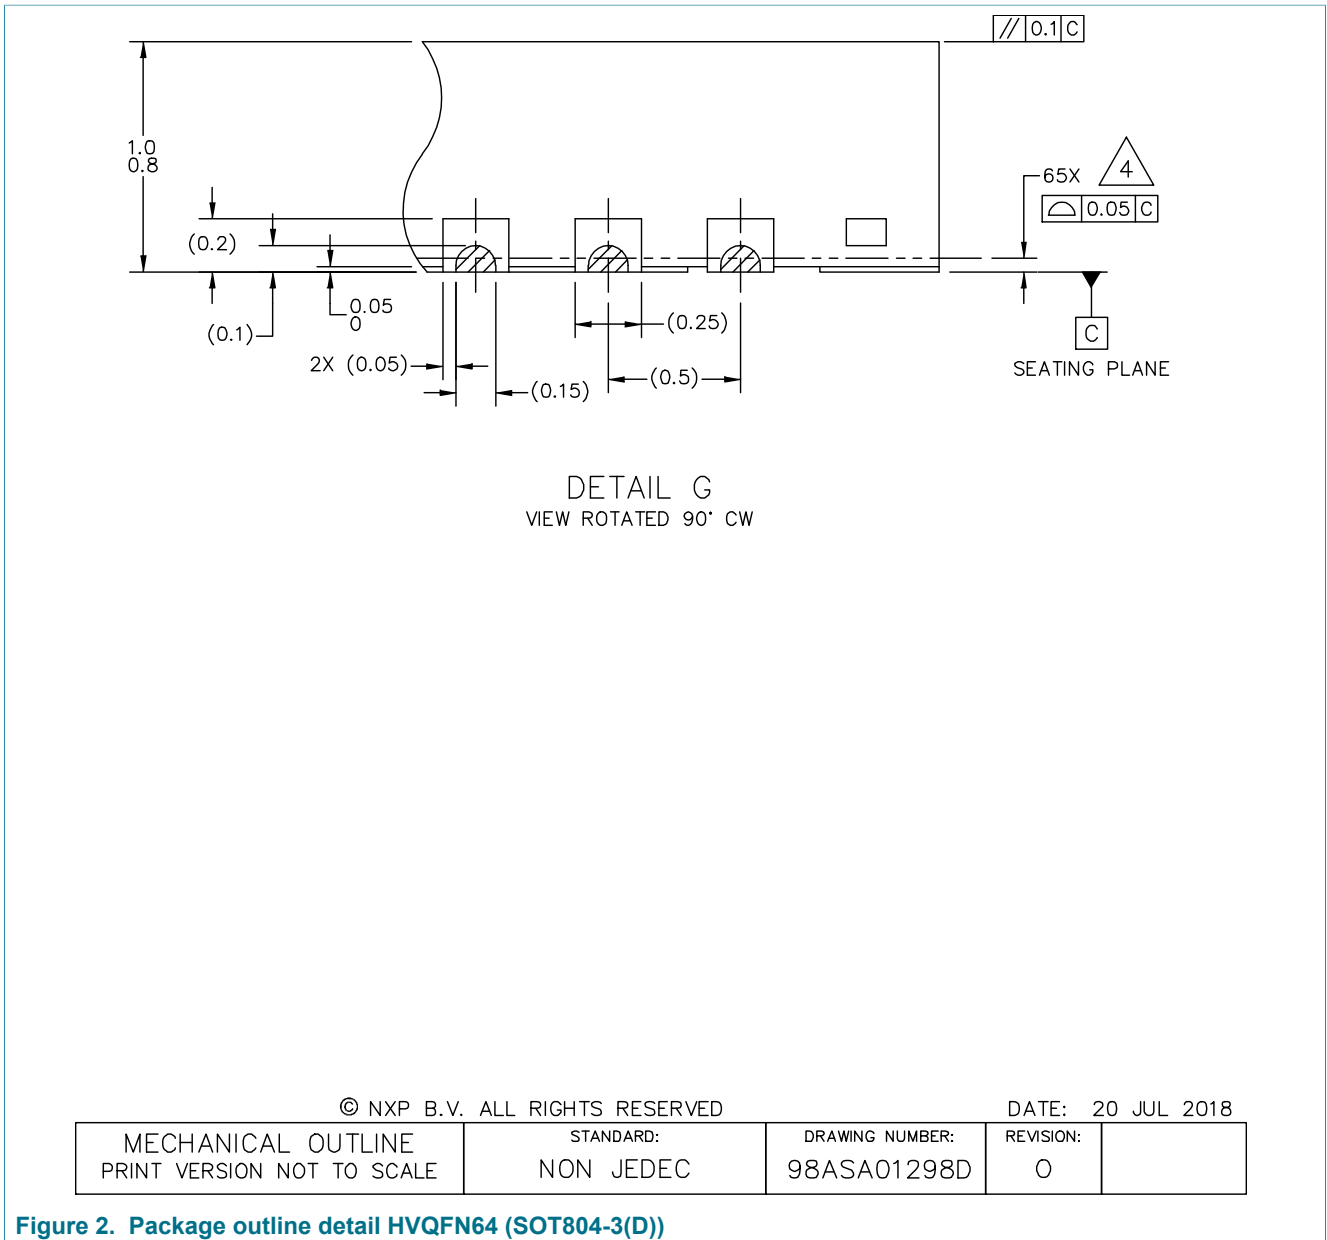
Package outline detail HVQFN64 (SOT804-3(D))
